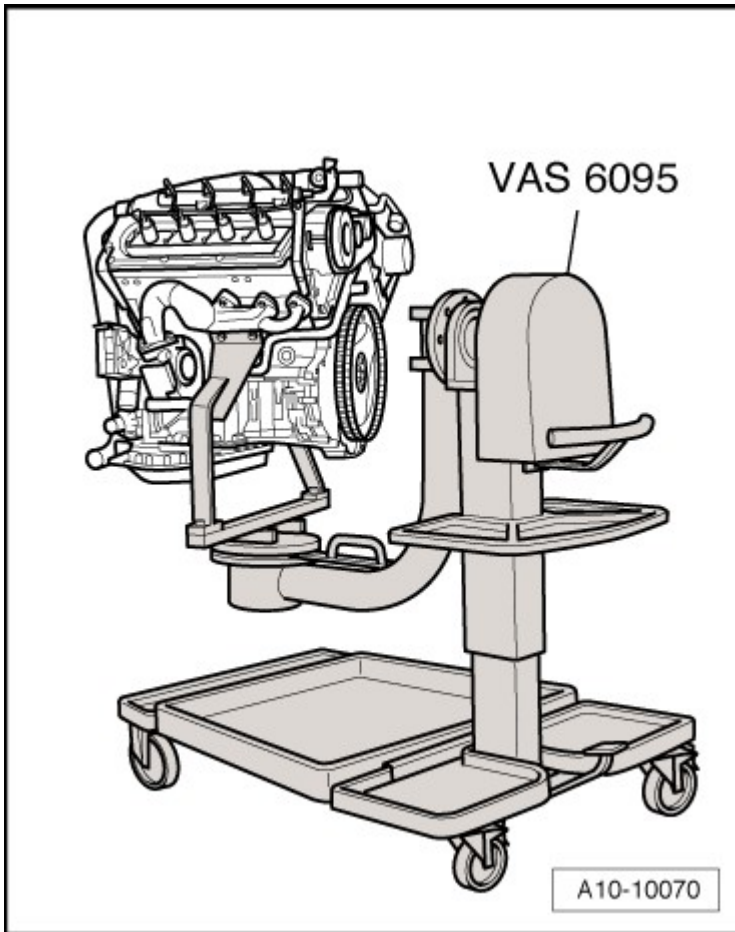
Identifying Engine, Holder VAS 6095 And Bracket For V6 FSI Engine VAS 6095/1-5
